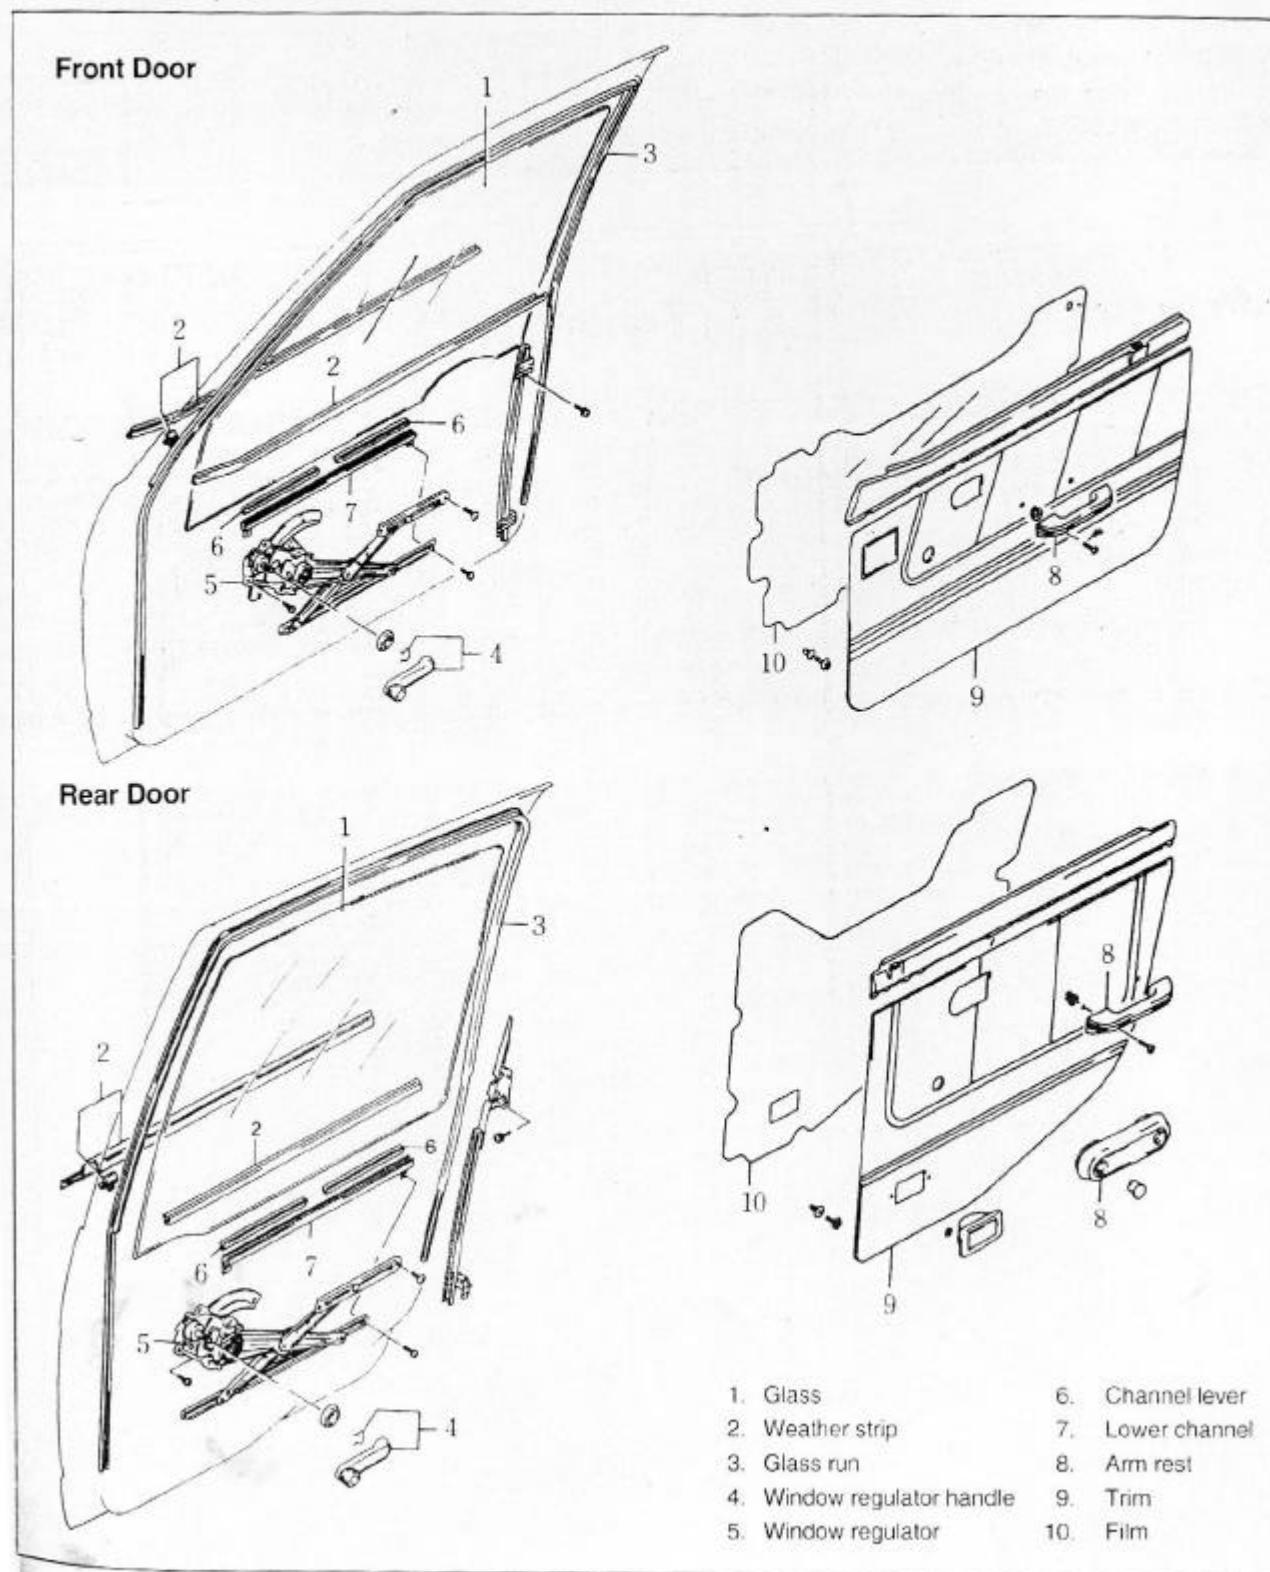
6 FRONT DOOR, REAR DOOR COMPONENT
